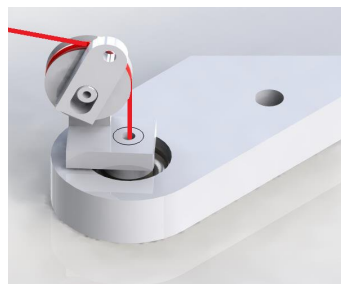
Pulley assembly of the cable-robot demonstrator [3]
